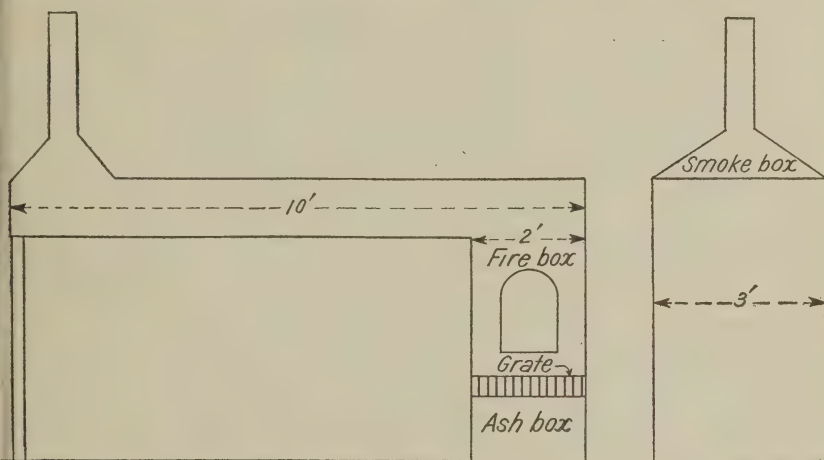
Side and end views of improvised furnace for evaporating drill samples of ore. Can be made by blacksmith out of  $\frac{3}{8}$ -inch or  $\frac{1}{2}$ -inch boiler plate. Smoke box of heavy sheet iron; smokestack, 6 feet of ordinary 6-inch stovepipe; evaporating pans, about 18 by 18 inches and 6 inches high, made of heavy sheet iron.
